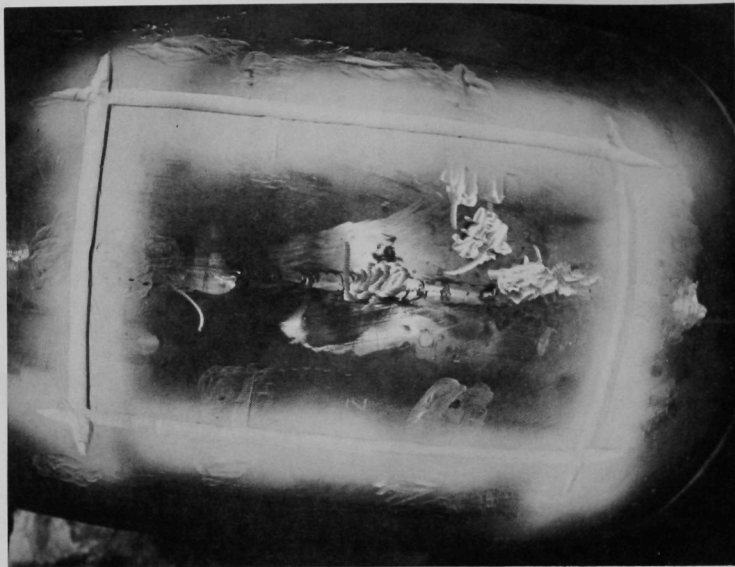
Inlet-elbow Closure Weld after Second Pass, with Liquid Penetrant Applied. ANL Neg. No. 103-05628.
